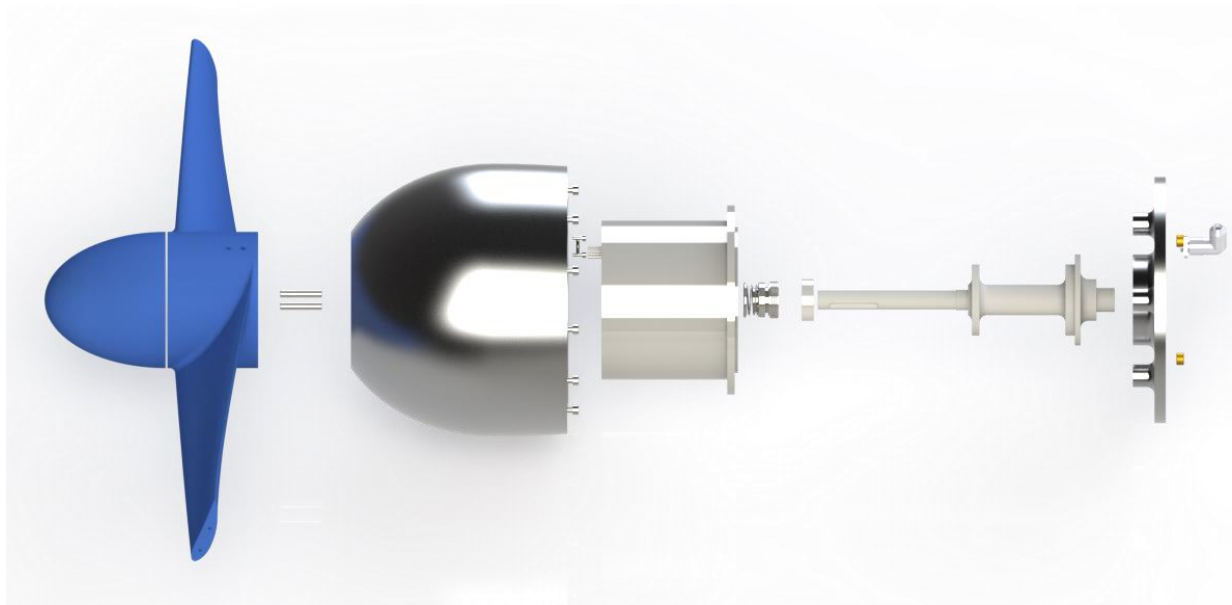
Final generator and impeller assembly. The generator assembly is comprised of a custom designed shaft, the Moog-Ag-12600-A-1ES generator and a custom design watertight housing.
